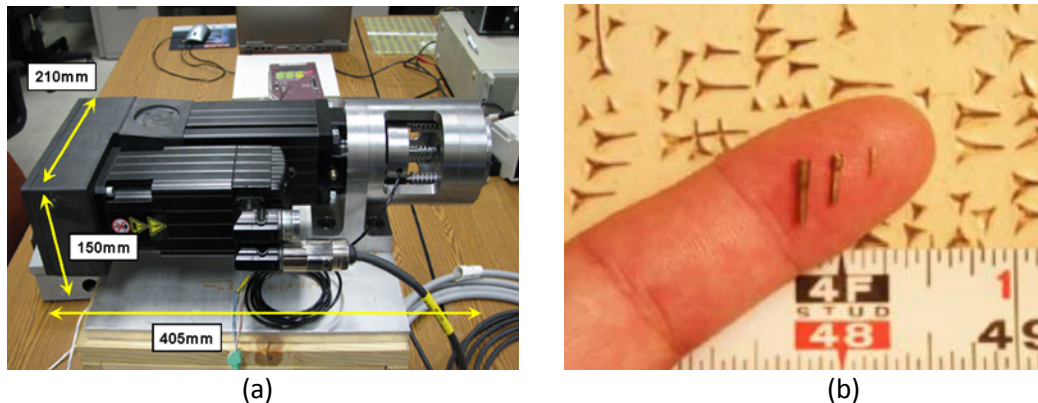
(a) Micro-extrusion machine developed at NU, and (b) typical extruded components
